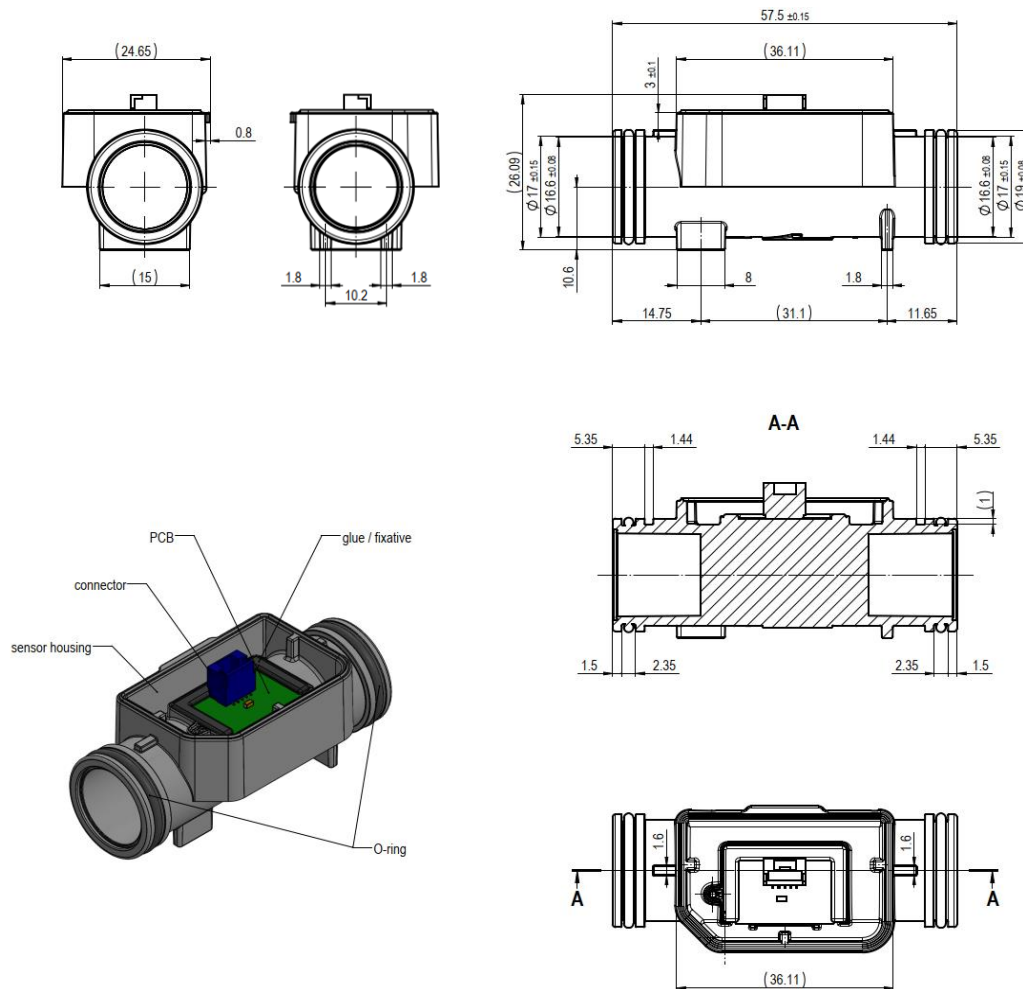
Drawing of SFM3505 with dimensions in mm. Extracted from drawing number 176937, revision 00.
